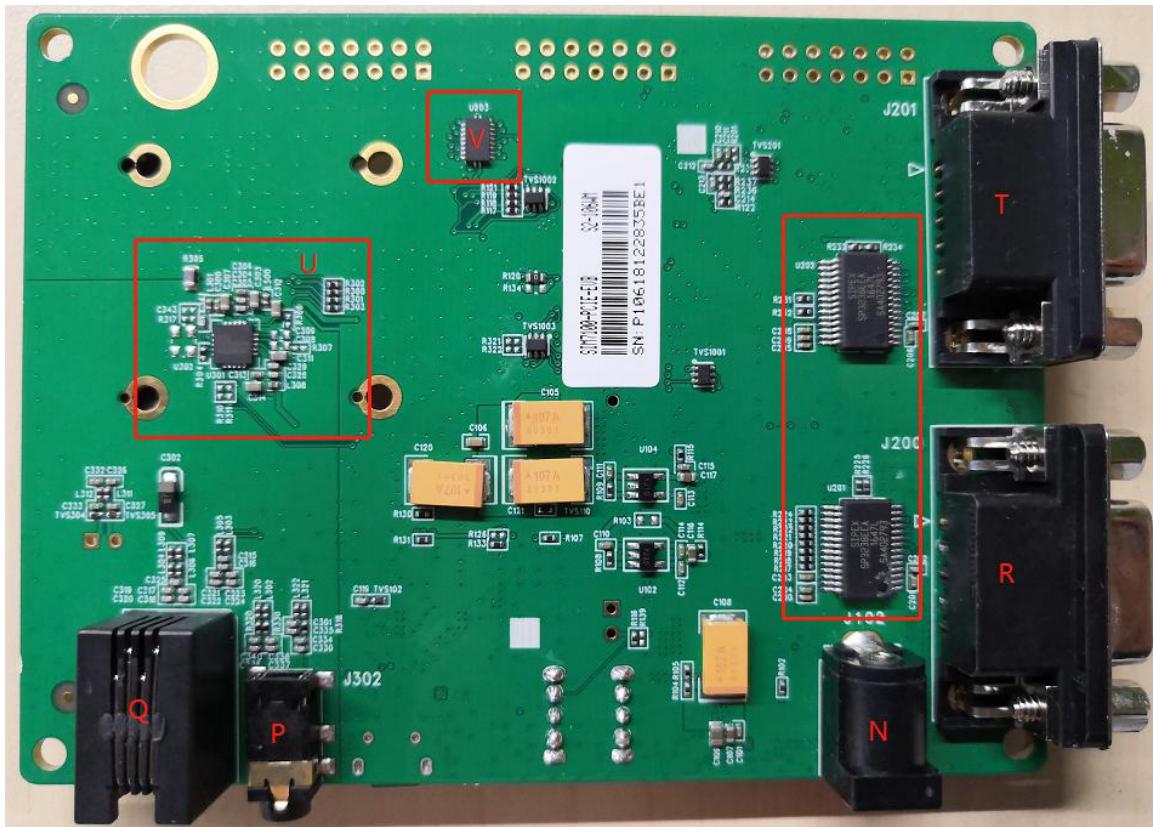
SIMCOM-PCIE-EVB BOTTOM view
